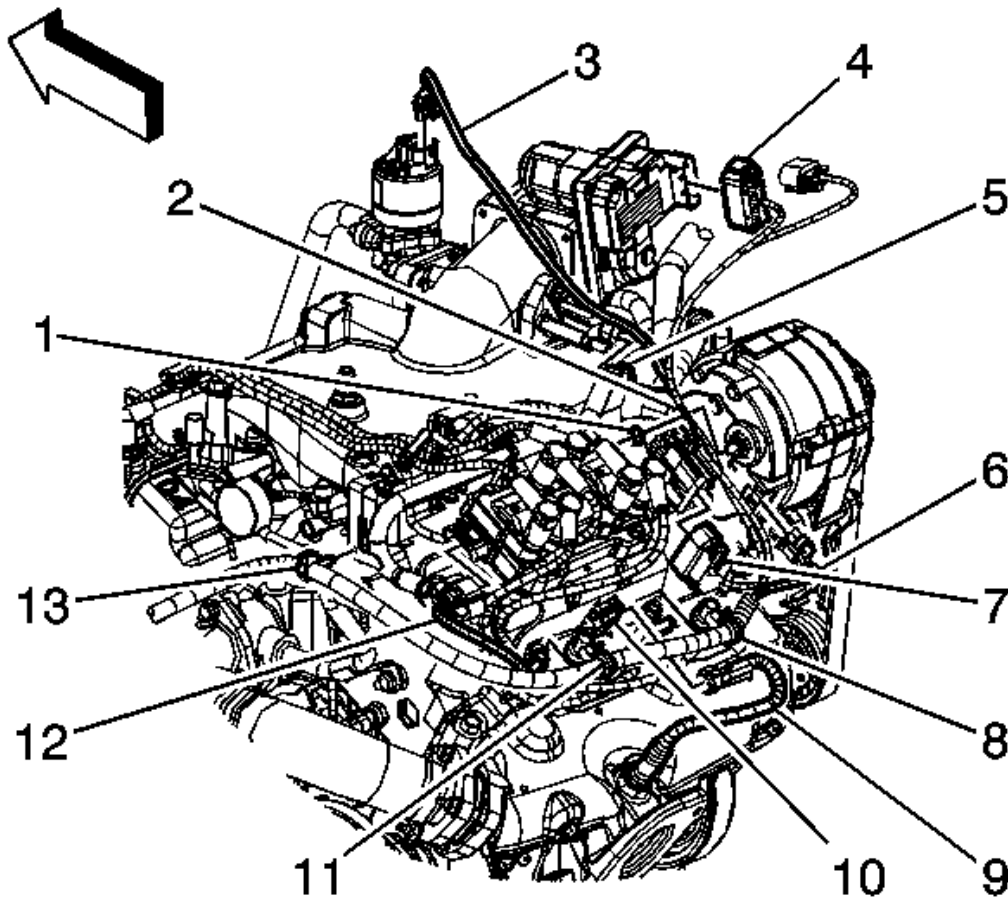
View Of Engine Electrical Wiring Harness Connections
